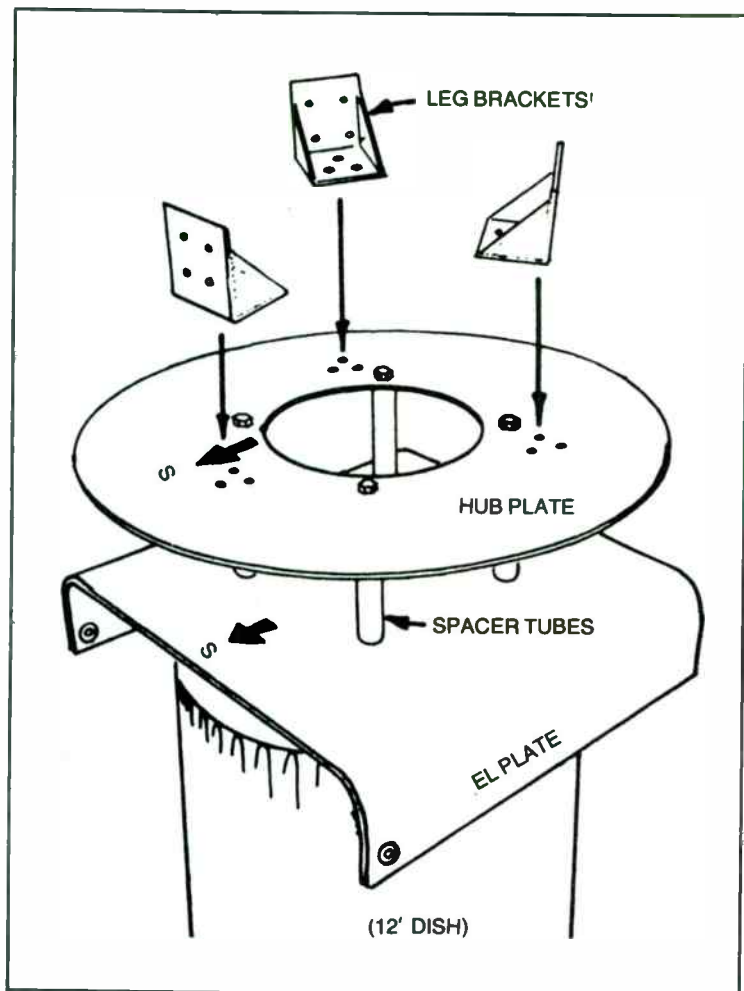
Dish assembly begins with pedestal subassembly. An inverted garbage can serves as a workbench.
